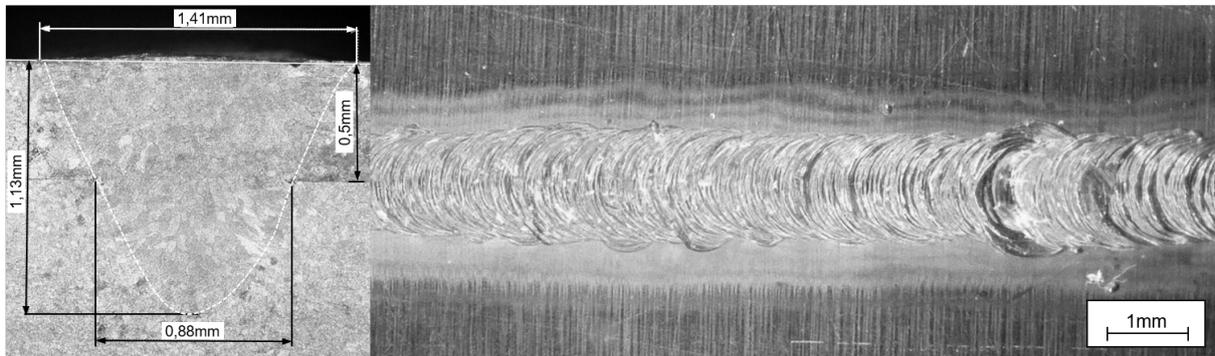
ARM laser, $v = 5$ m/min, cross section and weld surface.
